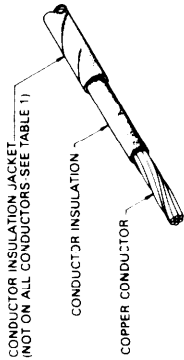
TYPICAL CONDUCTOR CONSTRUCTION
